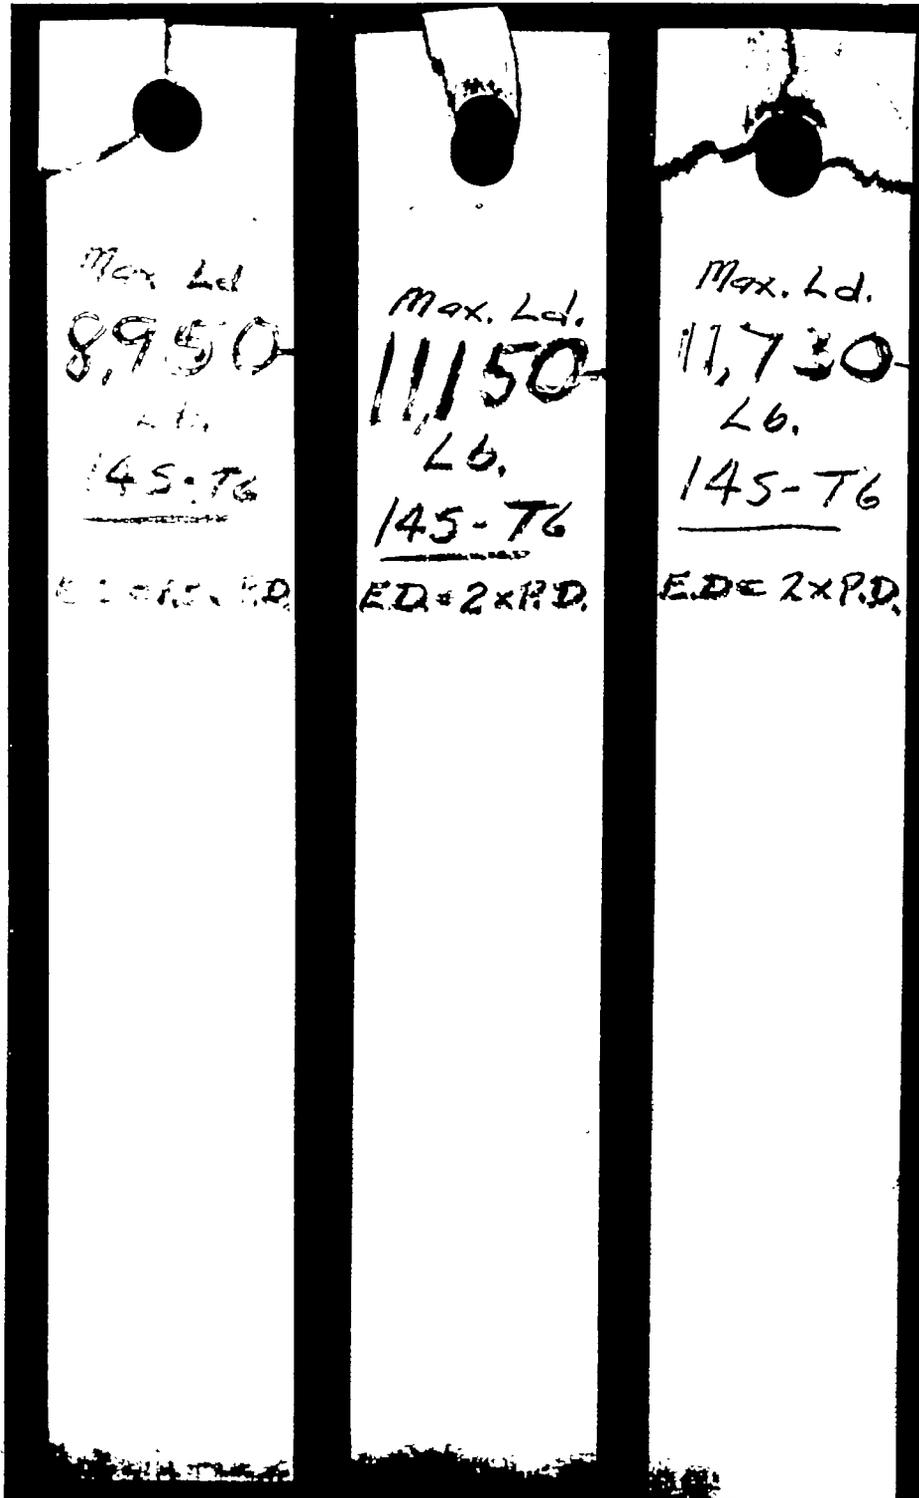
Samples of bearing test failures in 14S-T6 aluminum-alloy hand forgings.
